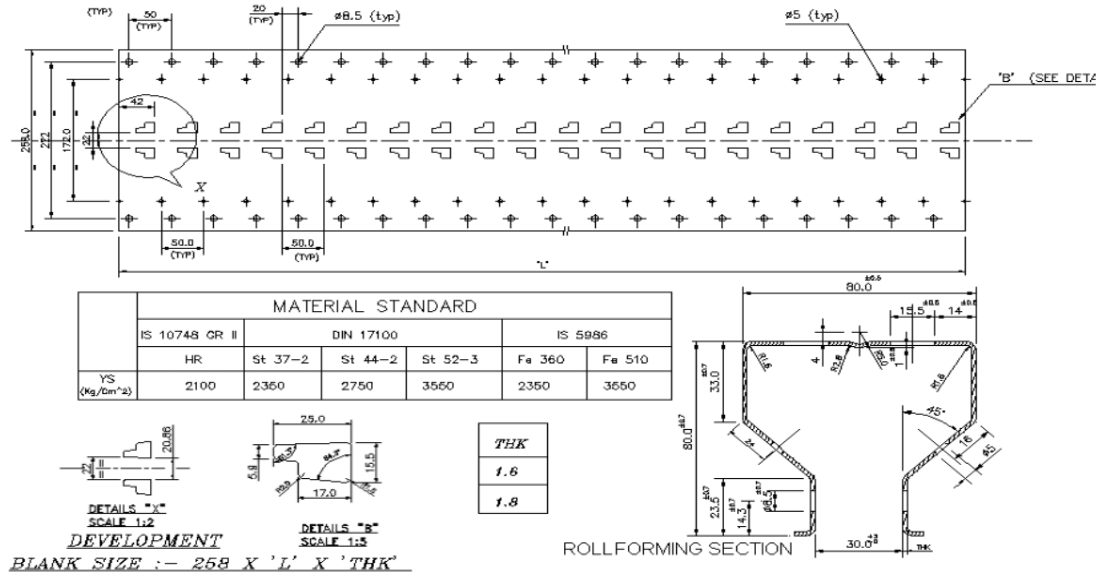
Medium weight (MW) column upright section as per Sangle et al. [9]
